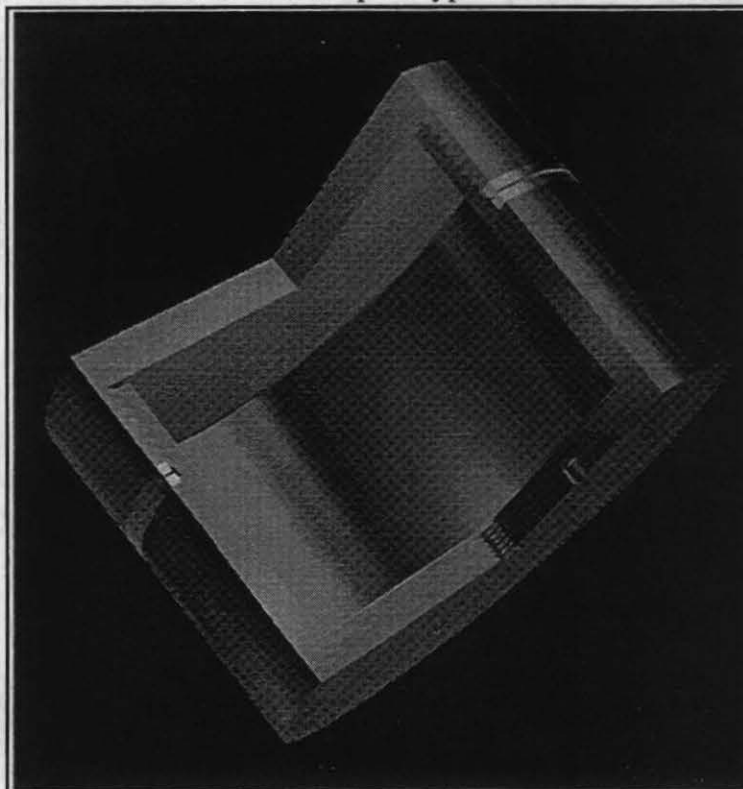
Prototype container with brazed closure. The current container design includes a 304SS vessel and threaded closure, with Ni-200 inserts brazed to both the vessel and closure using the BNi-5 alloy. The two Ni-200 inserts are then brazed/rebrazed with the BAu-4 alloy.
